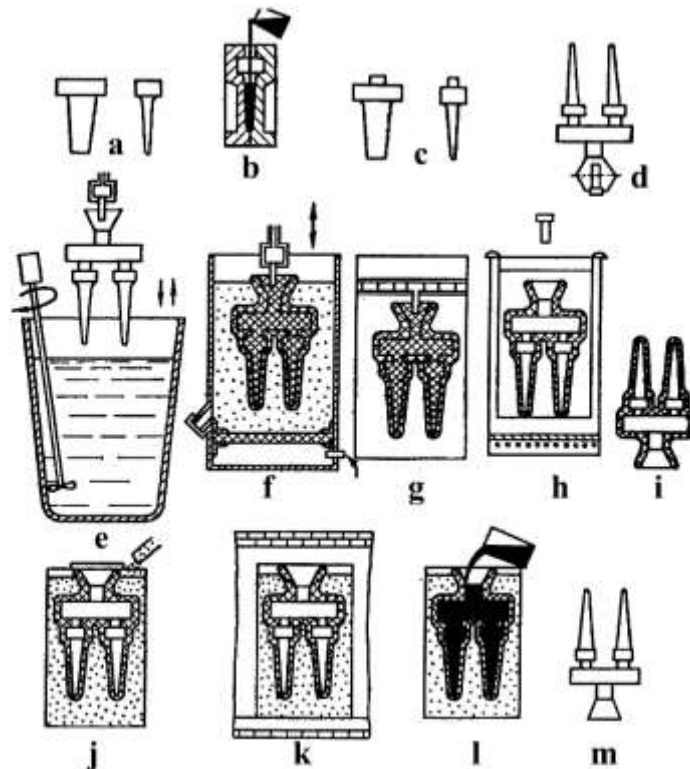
Investment casting process: a – part; b – pattern-making; c – pattern; d-pattern complete; e – dipping in suspension; f – dipping in fluidized sand; h – chemical drying; i – removing the pattern mix; j – setting of the block into steel box; k – heating of box; l – pouring of a metal; m – castings with gating system
